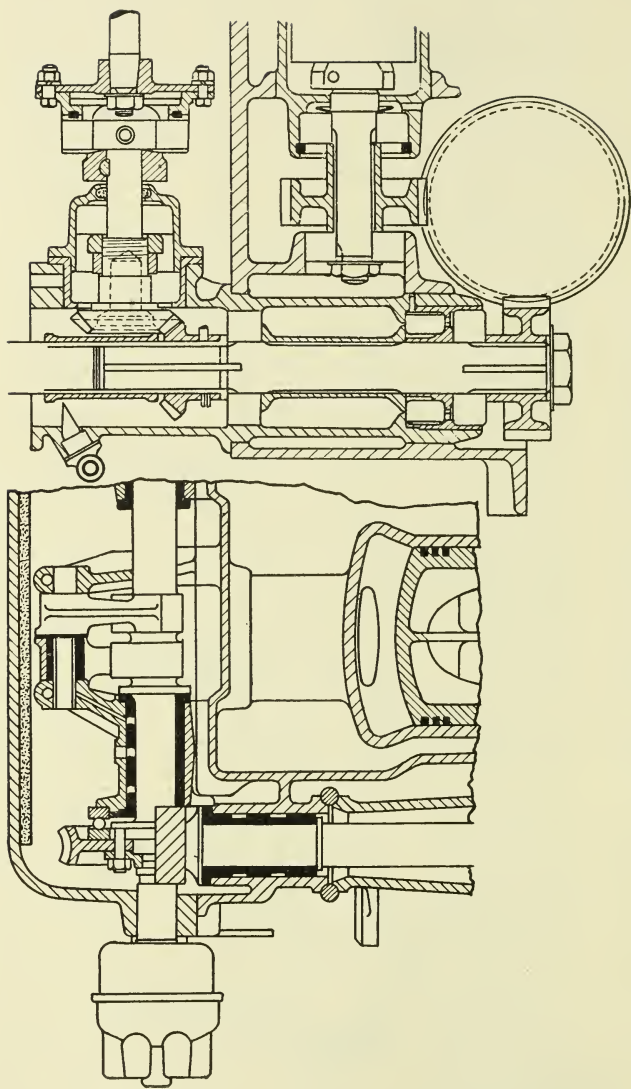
CAMSHAFT DRIVE OF LANCHESTER ENGINE
